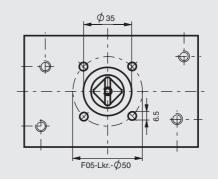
/15 Mounting onto part-turn actuators; mounting plate (scope of de-livery of actuator manufacturer), extract from VDI/VDE 3845, dimensions
